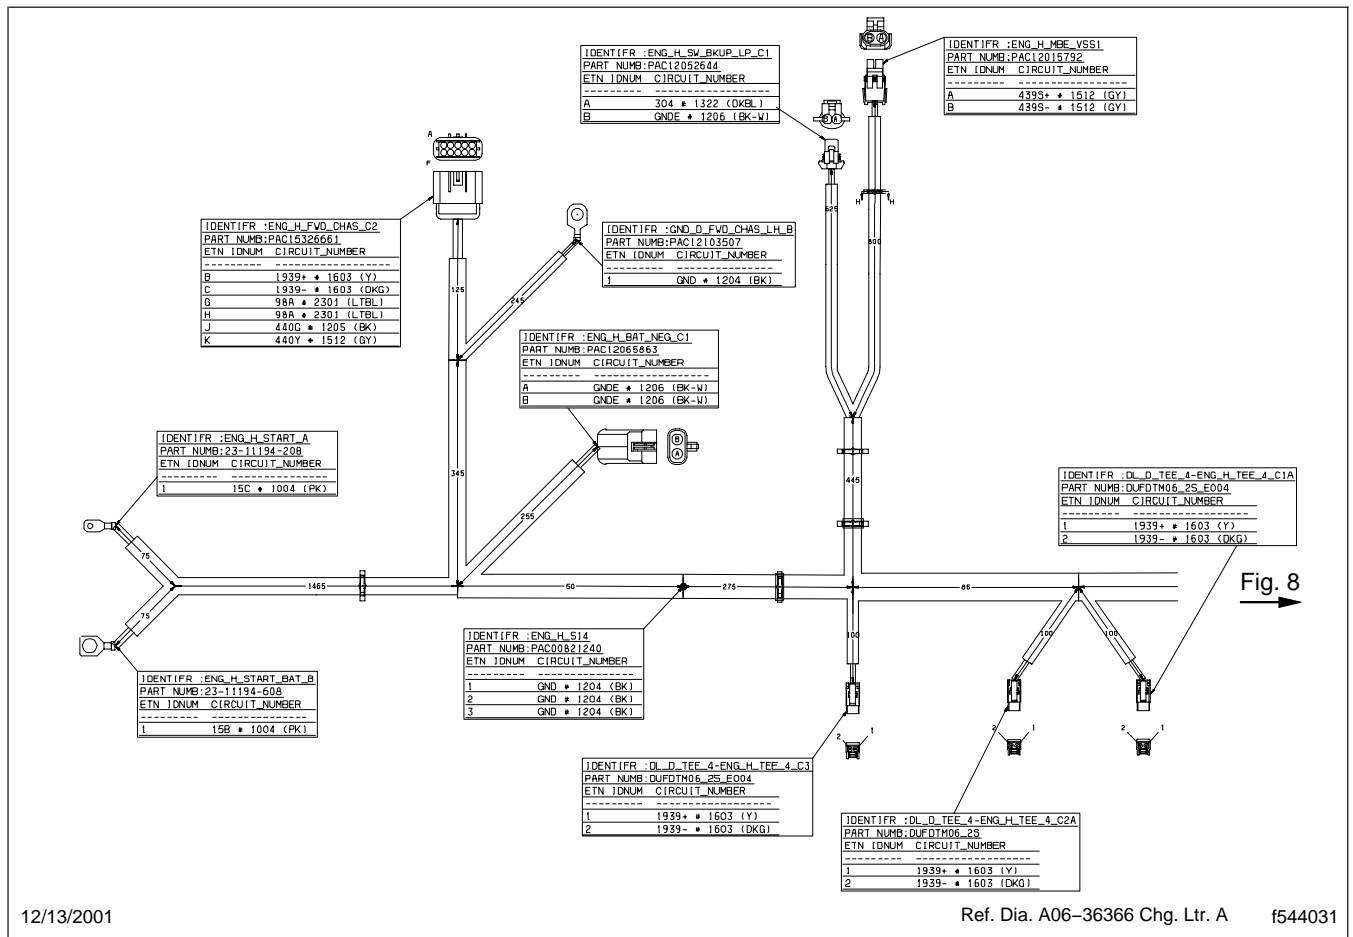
, MBE900 Engine Harness, Manual Transmission (detailed view, engine connector end)
